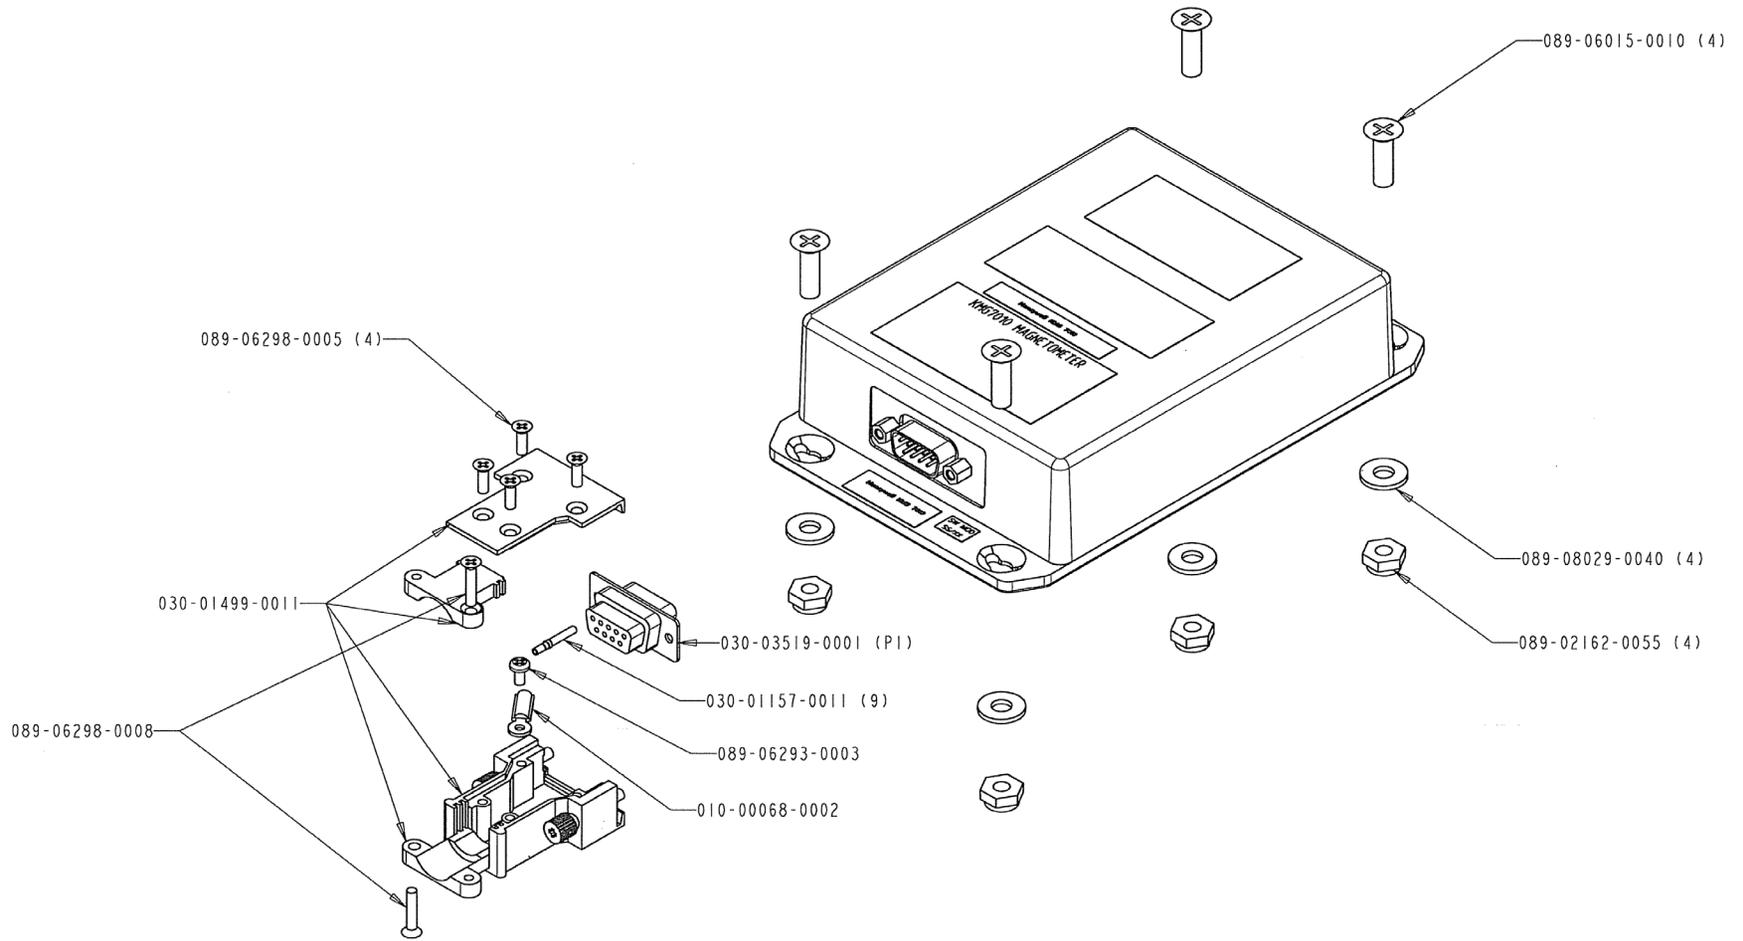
KMG 7010 Outline and Mounting Drawing (Sheet 2 of 2)
